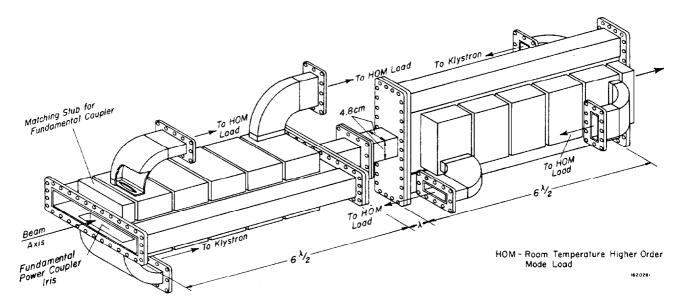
Sketch of a 1-meter section for CESR beam test. The assembly will be rotated 45° about the beam axis to maximize the aperture.
